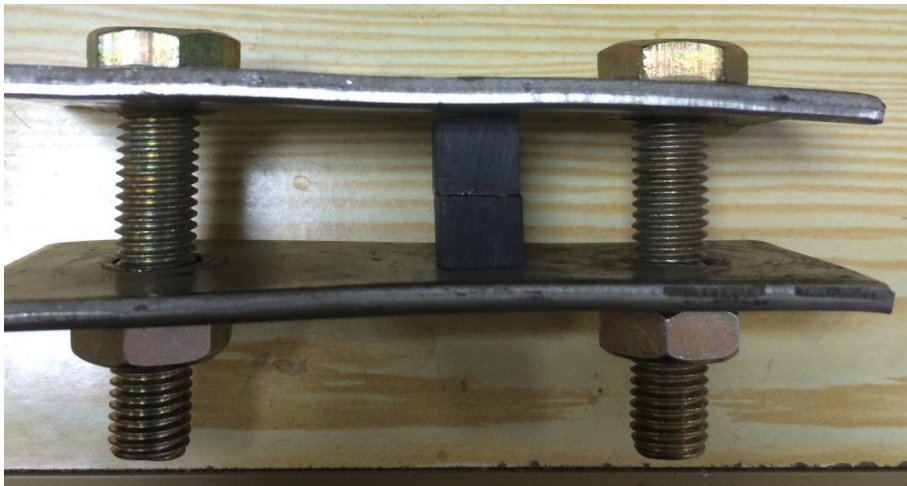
Stainless fixture hold the assembly (G/F5/G)
